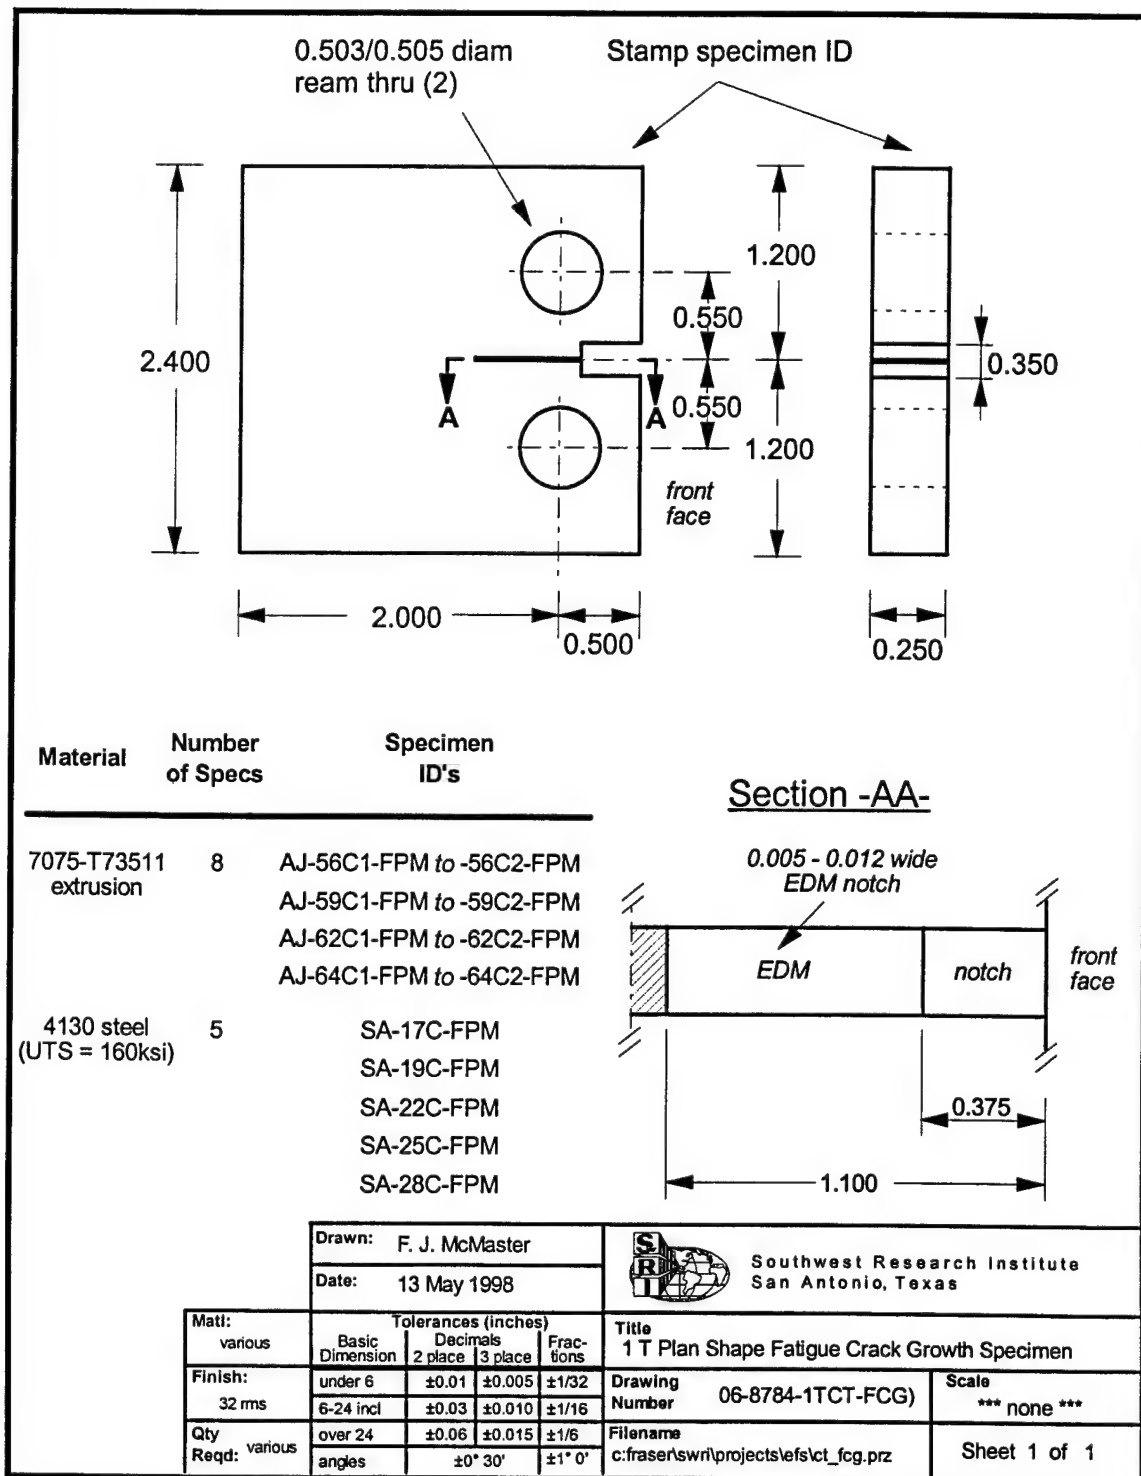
Specimen design used for the fatigue crack growth testing performed at SwRI (dimensions in inches where 1 inch=25.4 mm).
